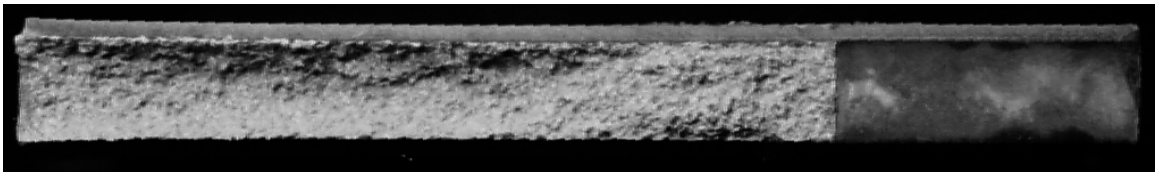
Fracture surface of side-grooved 6Al-4V Ti ELI specimen loaded dynamically.
